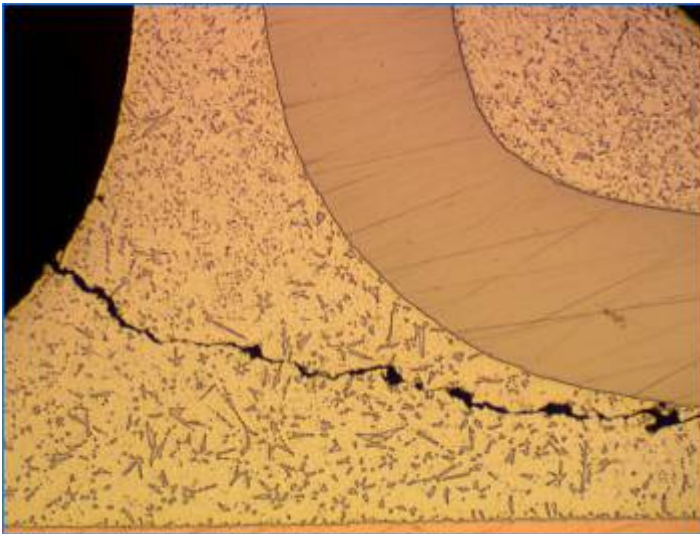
cross section, SN66, U61, right lead solder crack, 200xb
